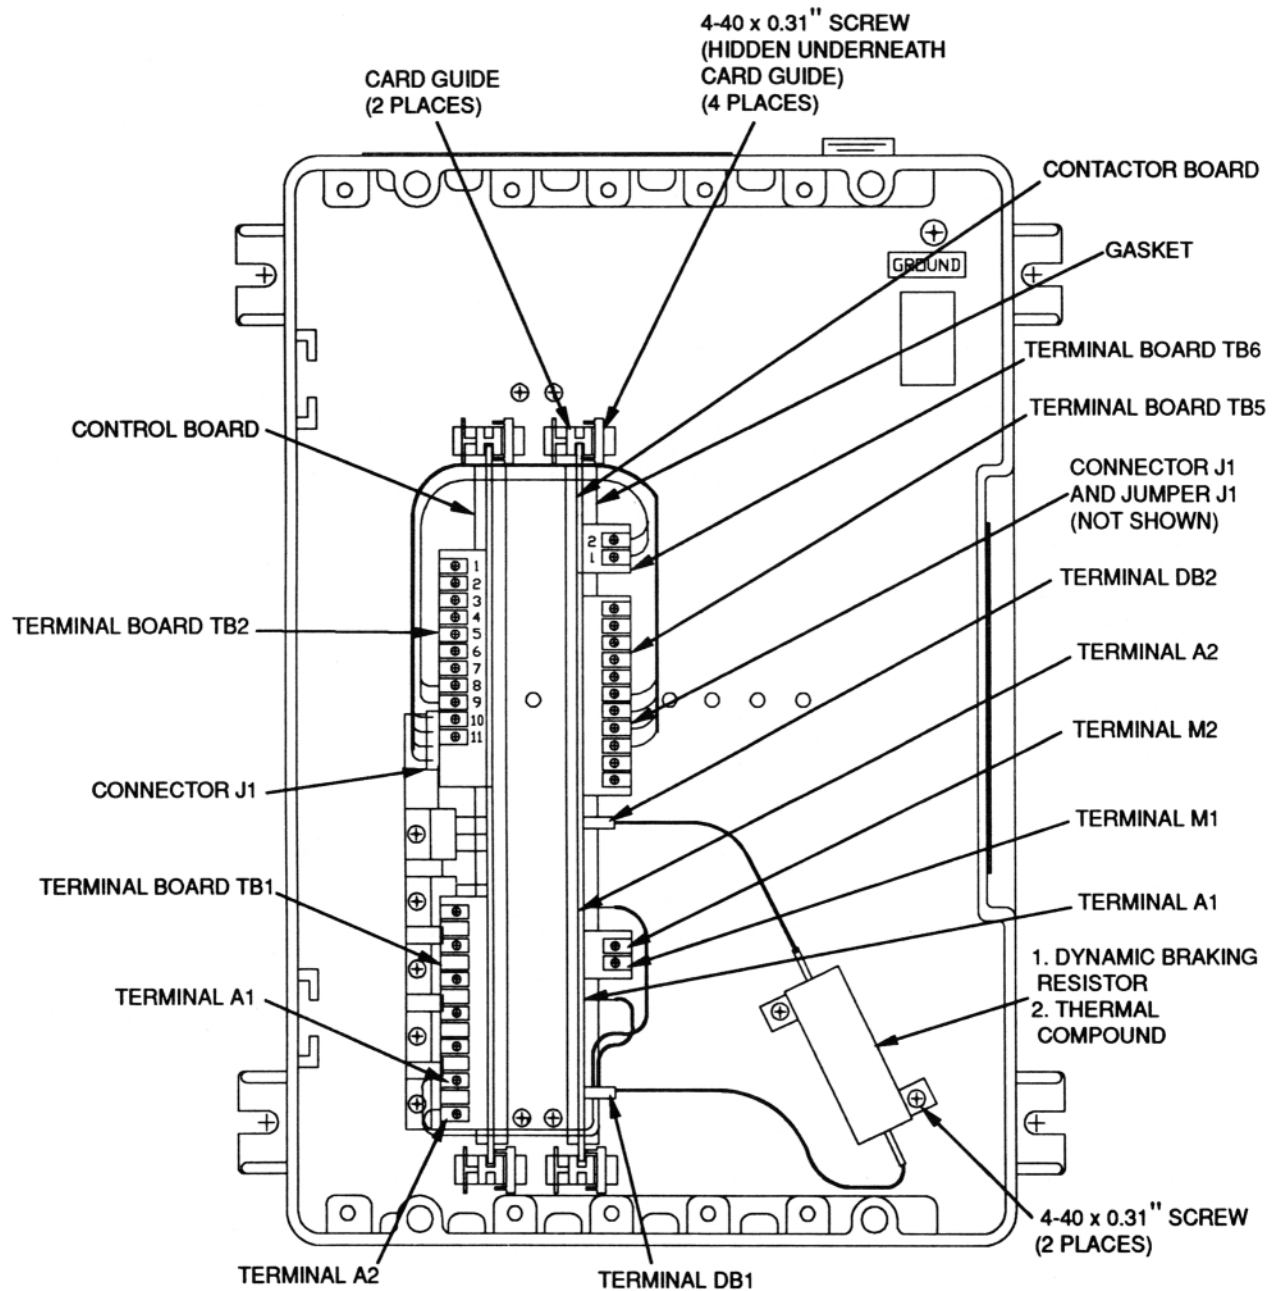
BOARD LAYOUT DRAWING, 1/6 - 3 HP
